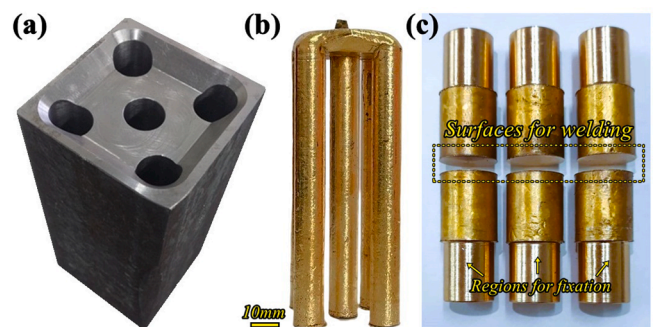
SAE 1020 steel metallic mold (a), ingot in the "as-cast" condition (b), and pre-machined ingots before the welding stage (c).
